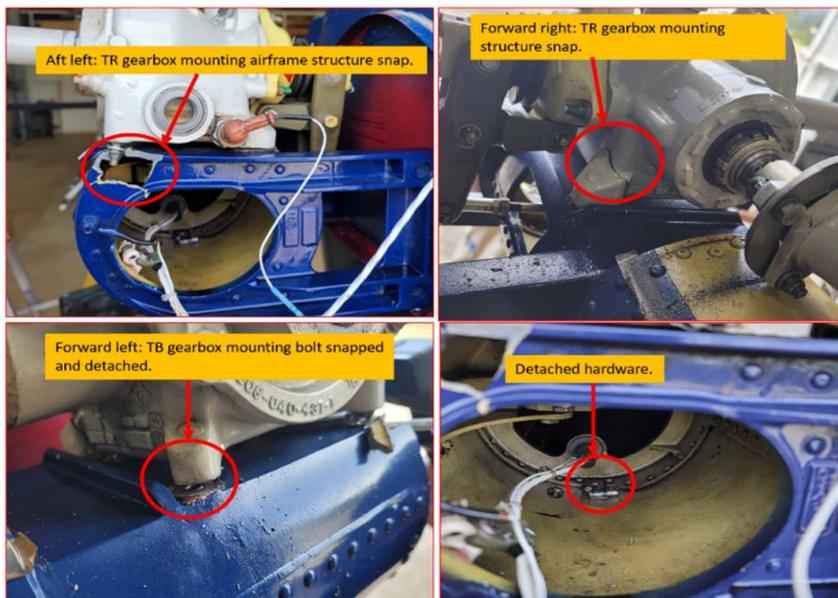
Damaged sustained to the TR gear box mounting structure.
